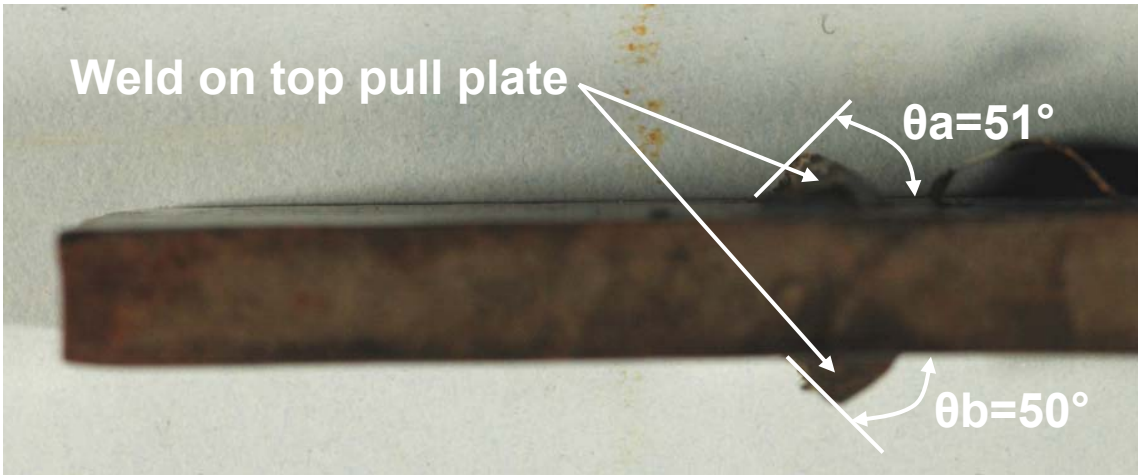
Photograph of a side view Specimen 4, where the profile of the fractured weld on the top pull plate is visible
